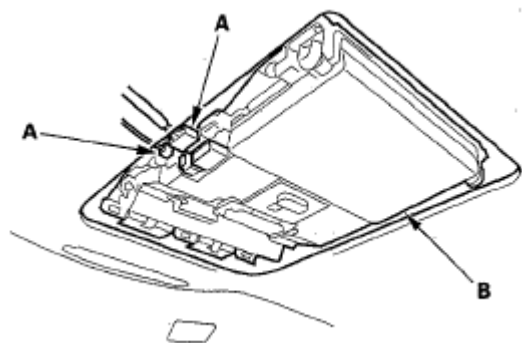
Identifying RES Wire Harness Connectors, Rear Controller And Screen
